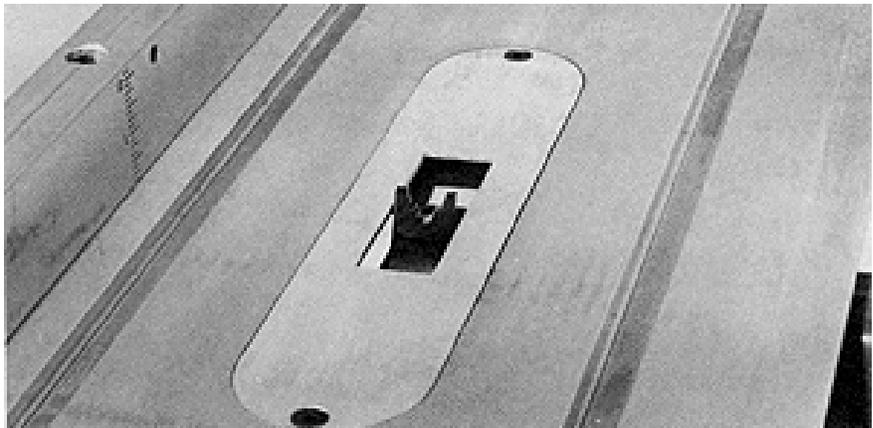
The molder head must always be used with the special molder insert (Model 500 insert shown).
